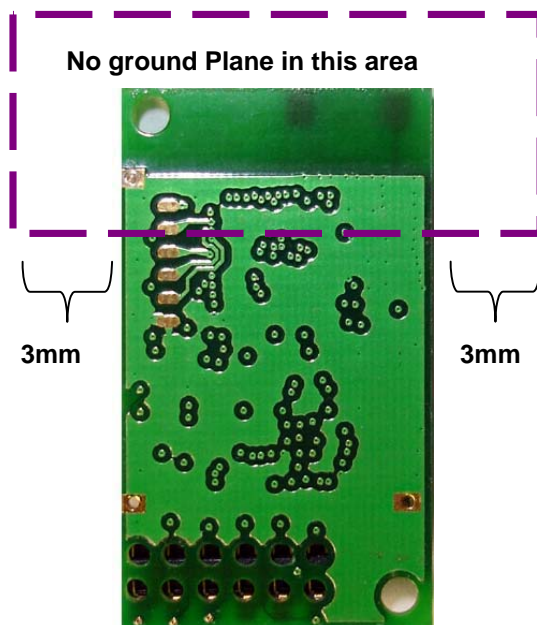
Bottom View of PCB indicating where there should be NO Ground Plane
